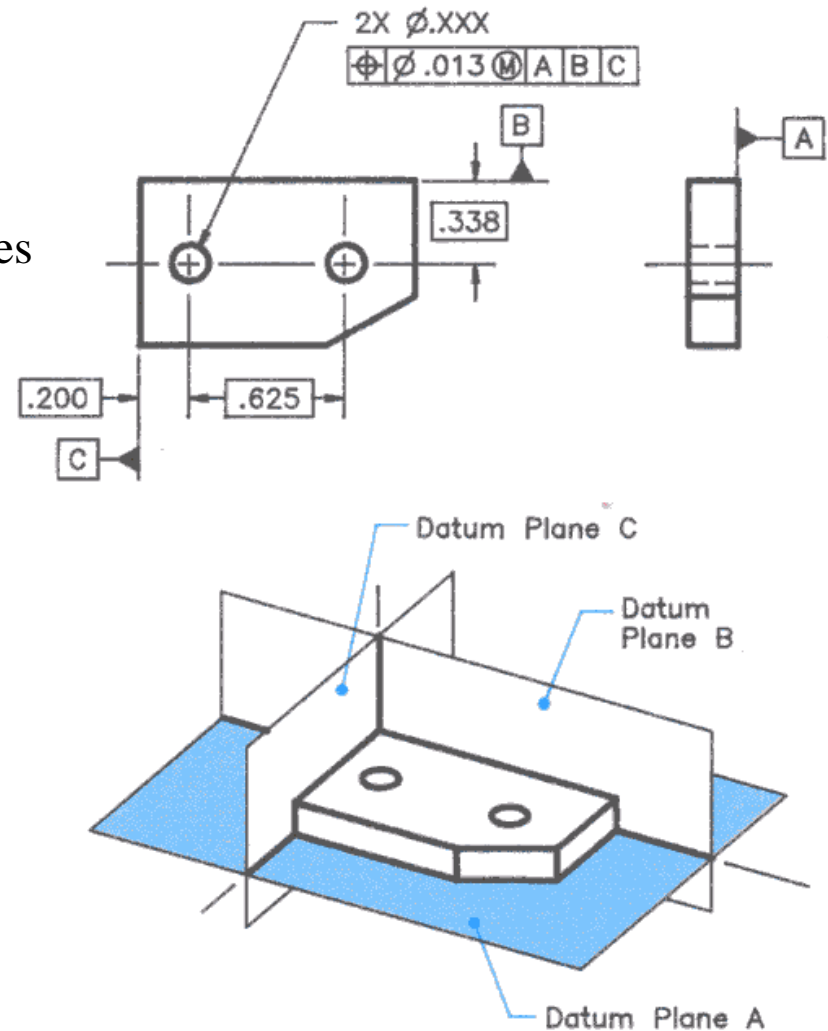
Datum references made in a feature control frame determine how a part is located in the datum reference frame.
